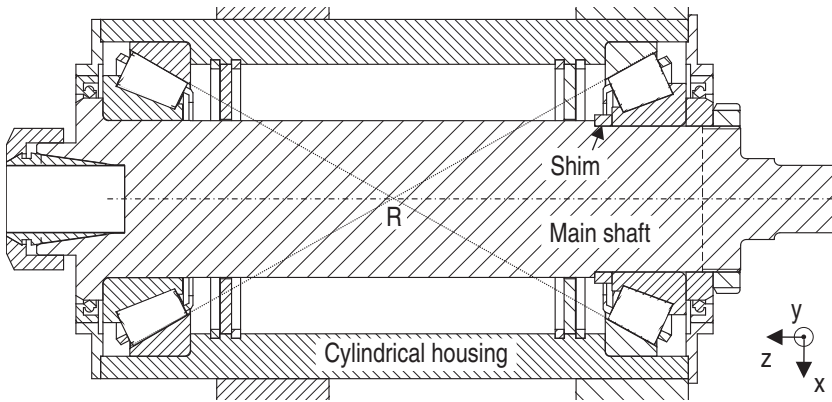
Cross-section of the spindle. Both bearings are mounted in the same cylindrical housing. The roller cone apices R of the two bearings coincide at one point. The preload is set based on the thickness of a shim.
